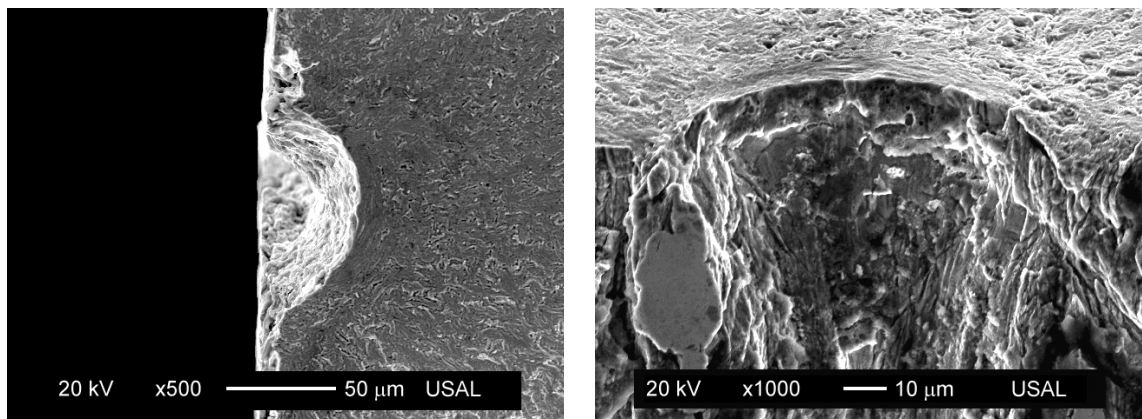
Surface defect caused by cold drawing producing transverse cracking in the prestressing steel wire (left) and magnification of the surface defect (and consequent fatigue crack growth) viewed from different angle (right)
